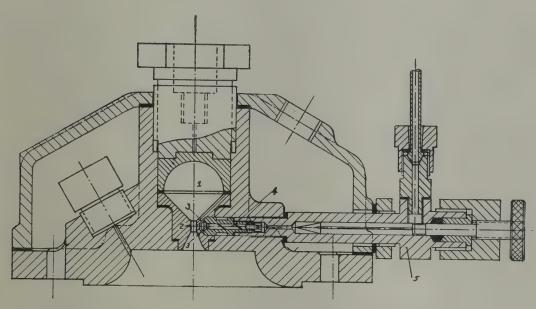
Cross-section of cylinder-head for experimental two-stroke Diesel engine with low-pressure injection
